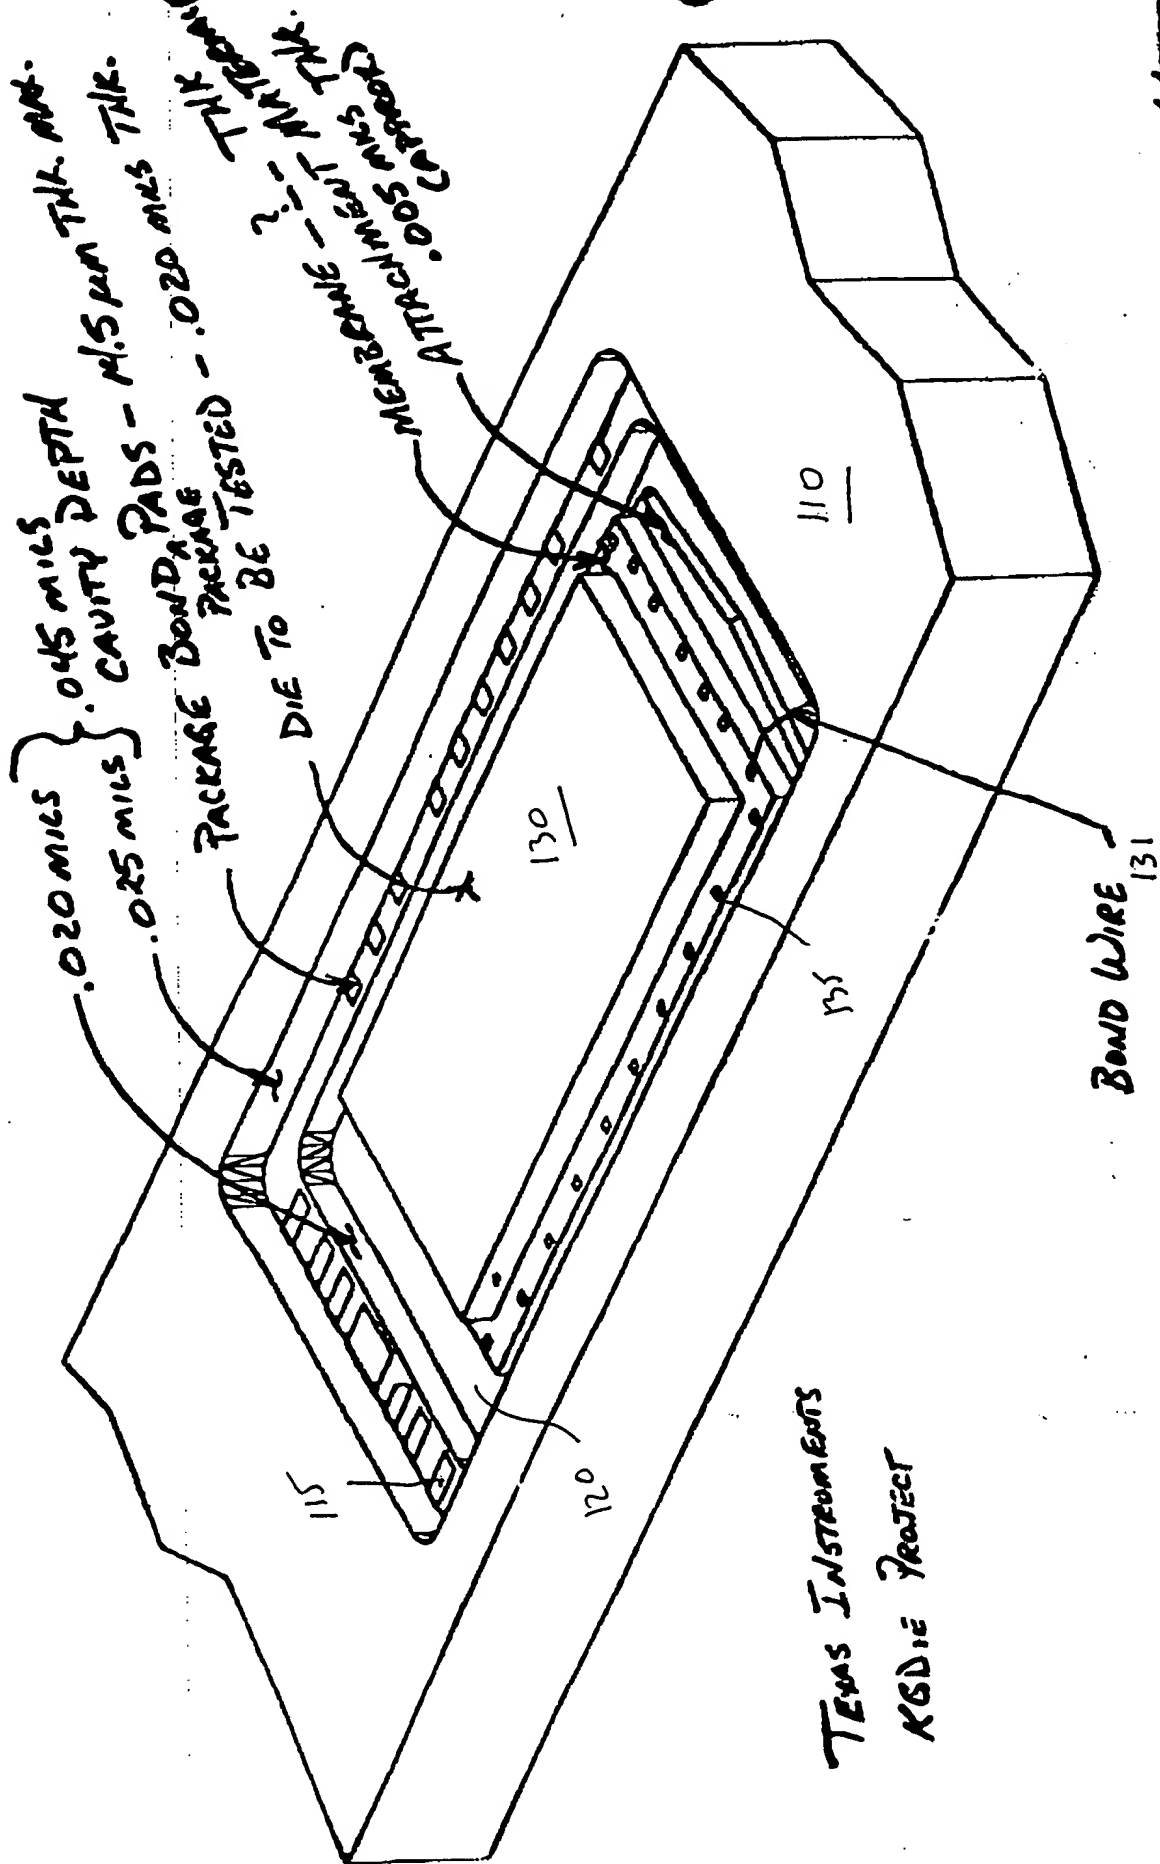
Flip Configuration of K6DIE Package, Exploded View
